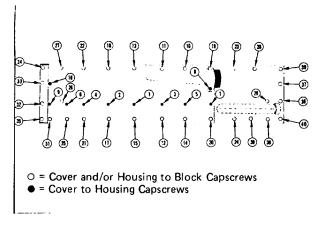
N-89. Lubricating Oil Cooler and the Housing Torquing Sequence
